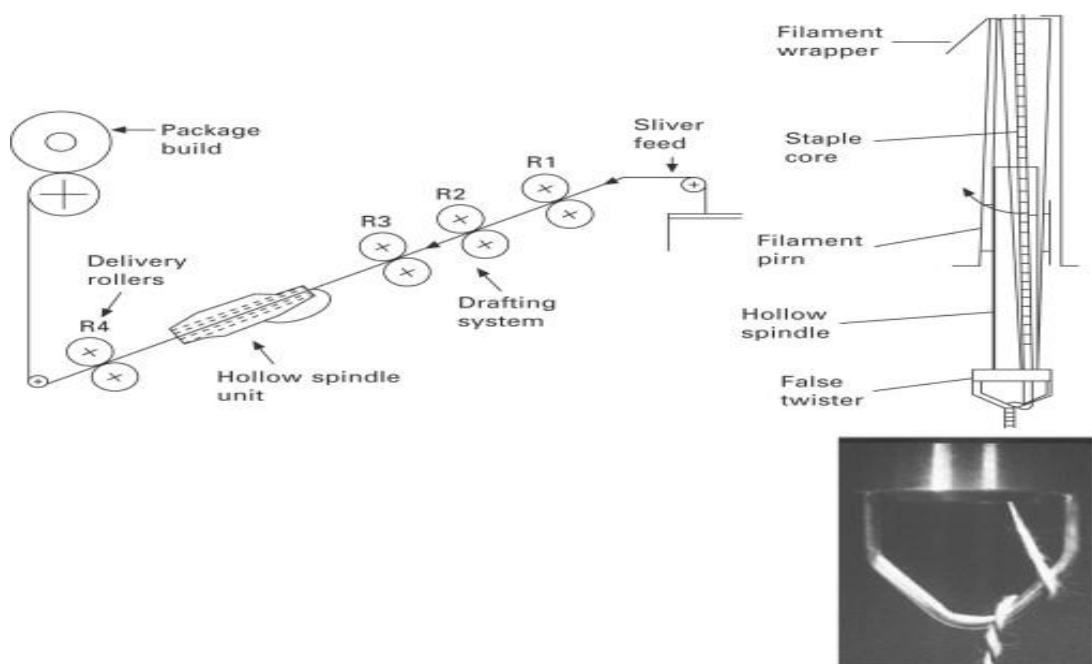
Schematic illustration of the hollow spindle machine [15]
